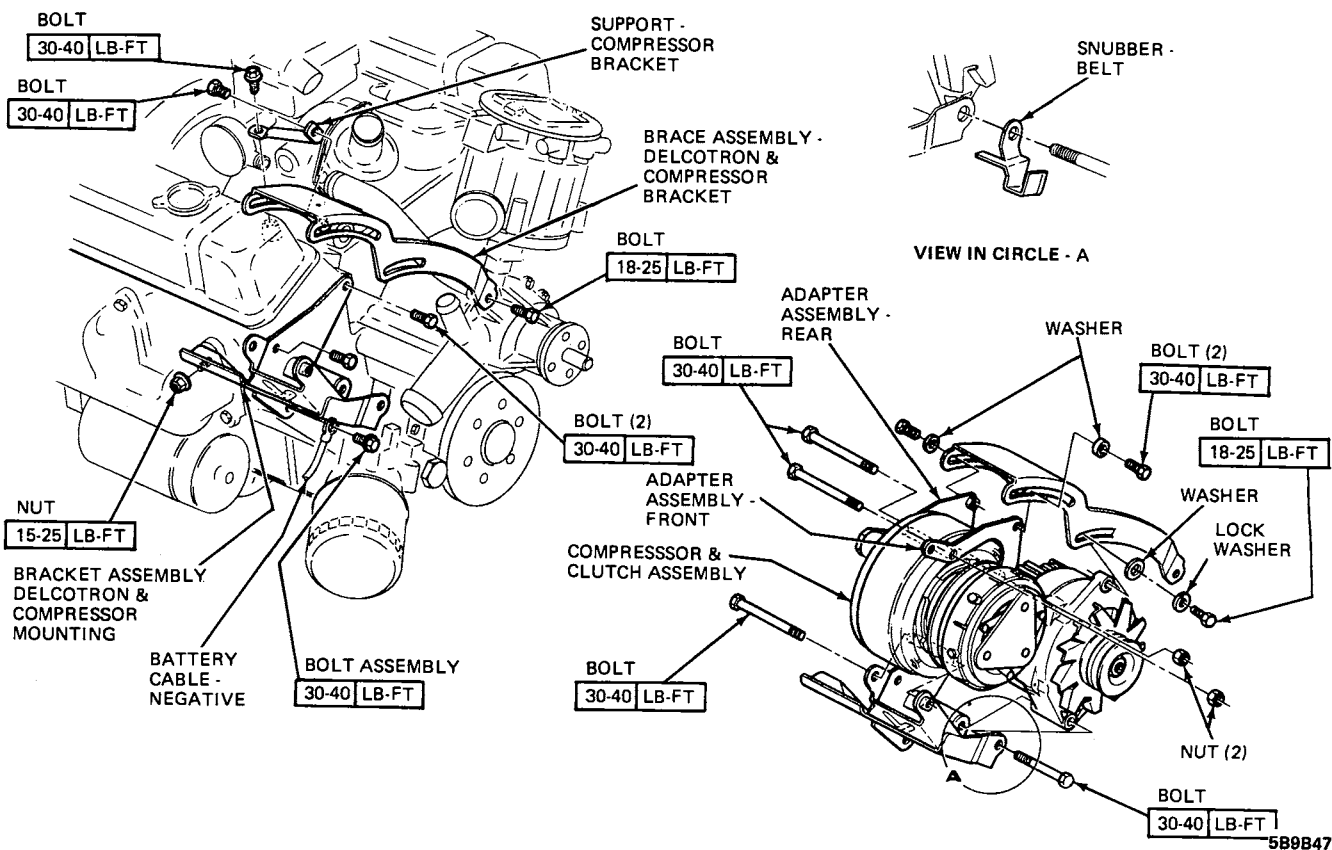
B-138 - A/C Compressor Mounting - V-6 231 Engine - A, X Series
